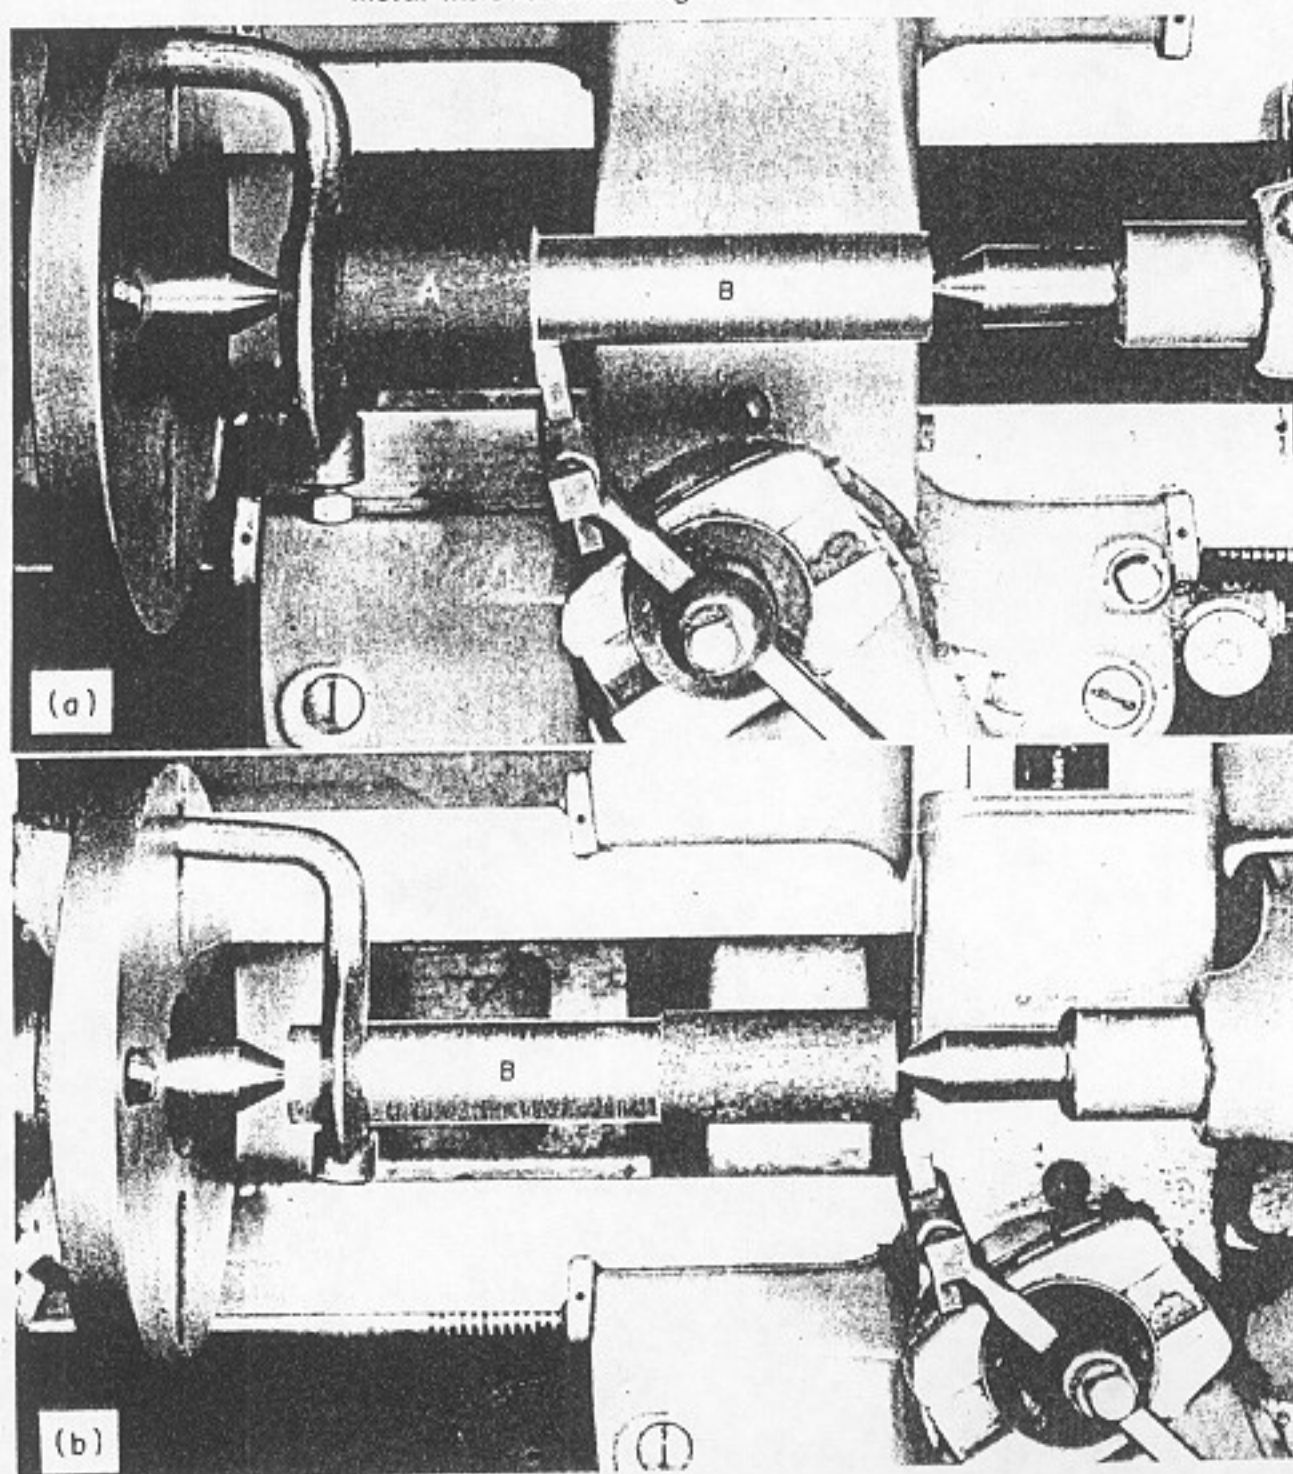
As few roughing cuts as possible should be made to reduce the metal down to the size for a finishing cut.
